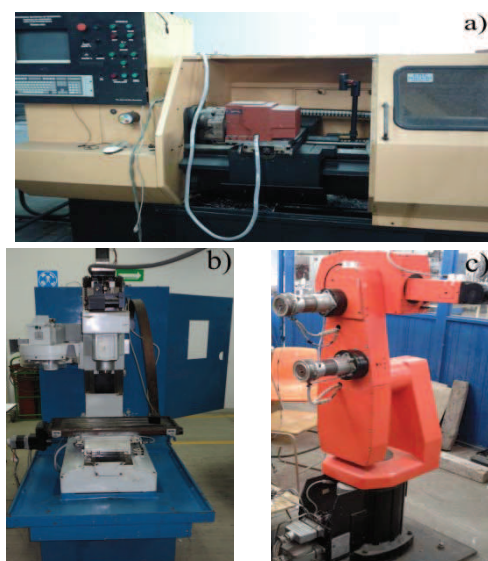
Servo systems used, a) CNC Lathe, b) CNC milling machine, and c) Industrial PUMA robot.
